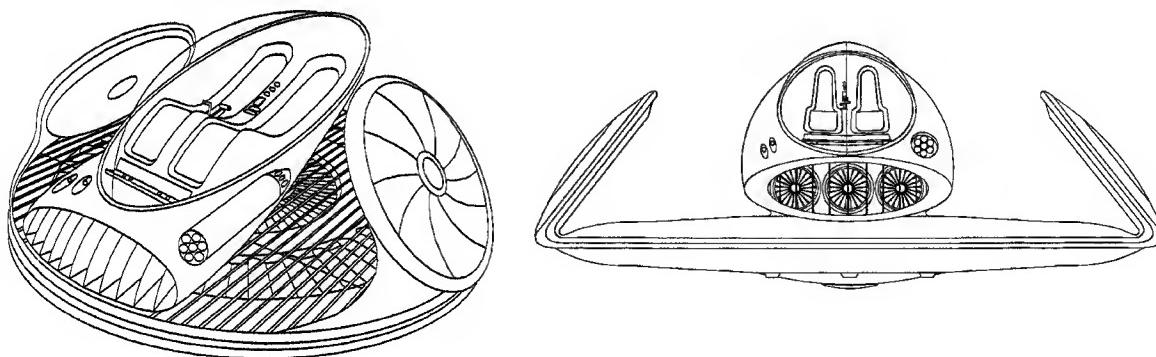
is a top, front, perspective view of a circular wing flying saucer showing my new design;
